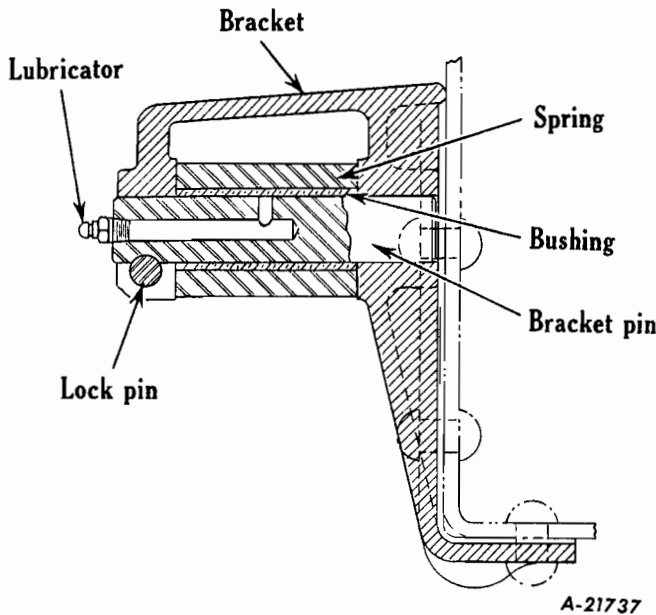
Rear Spring Front Bracket For Models L-180, L-183, L-184, L-185, LC-180, L-190, L-193, L-195.
